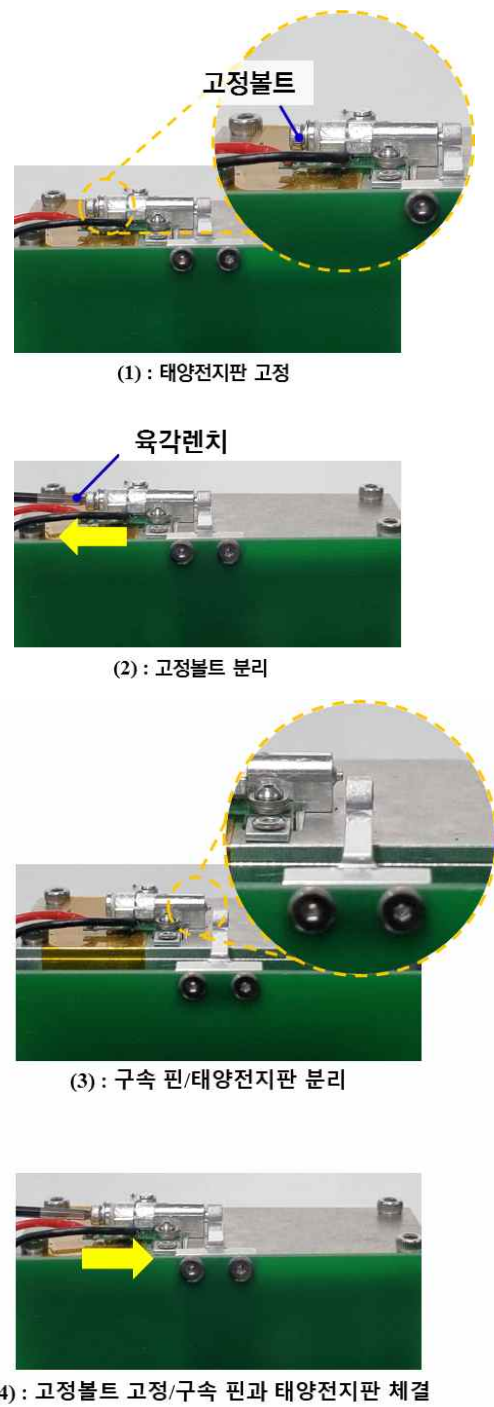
Examples of Mating and De-mating Process of Solar Panel without Nylon Wire Cutting-out
